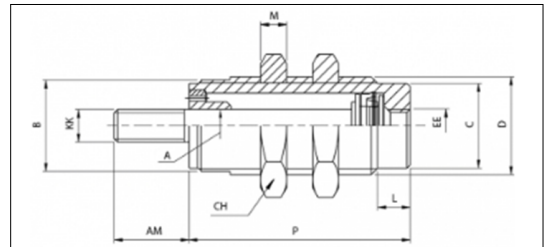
Pneumatic cylinders of the foil cutting unit. [6]
